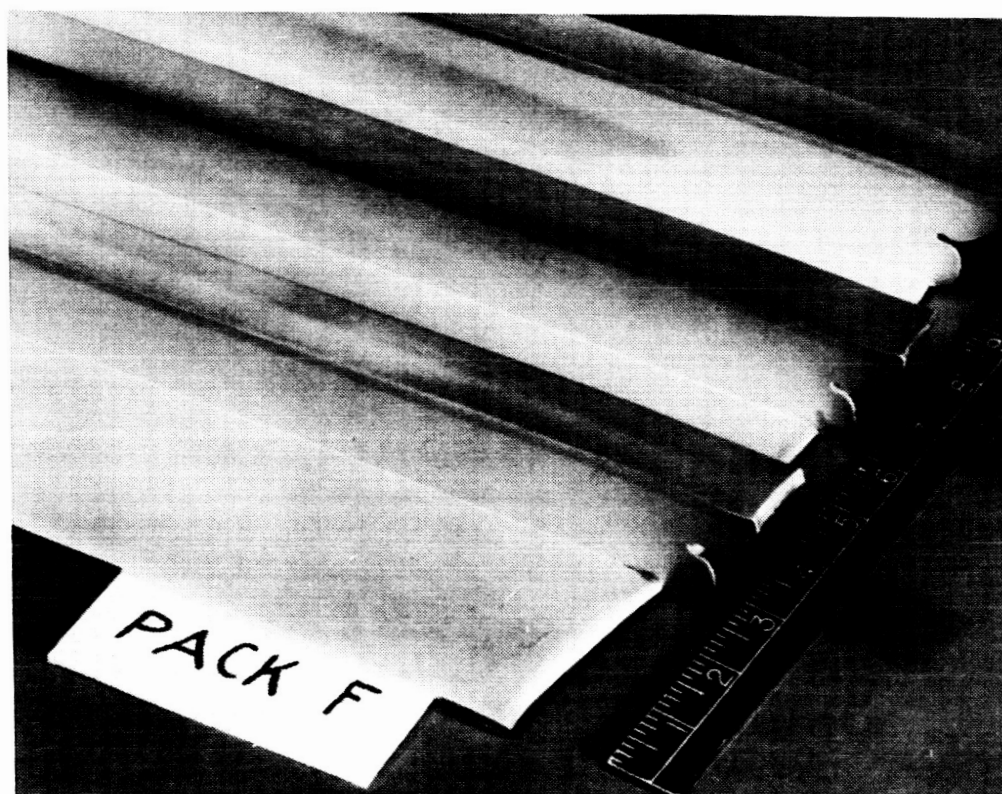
Good Appearance of Web-to-Face Sheet Bond in Panel F
